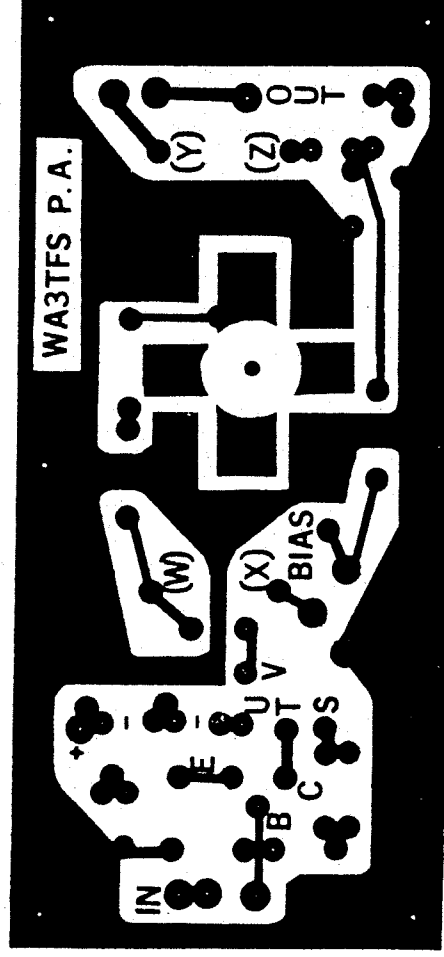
The foil side layout for the RF amplifier board. All parts on this board are mounted on the foil side.
